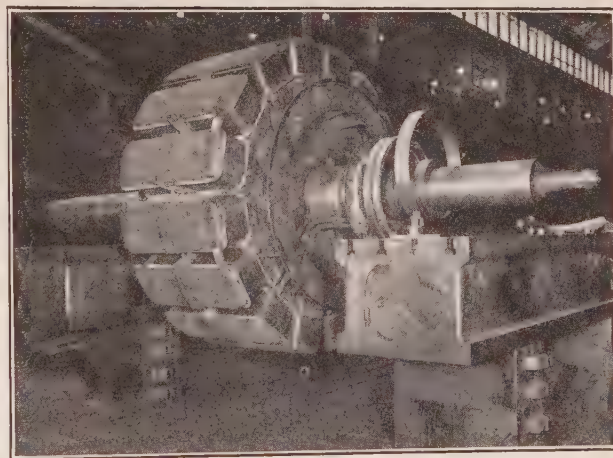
ROTOR OF 8125 KV-A. 6600-VOLT, 50-CYCLE, 600-REV. PER MIN. WATERWHEEL GENERATOR
